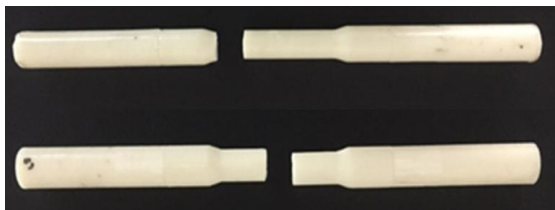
Change of fatigue fracture part affected by notch shape
